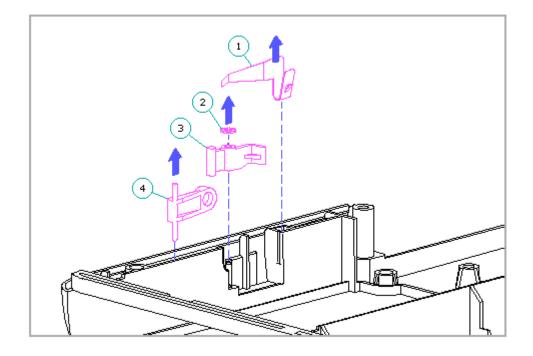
Removing the Hard Drive Release Latch Assembly
